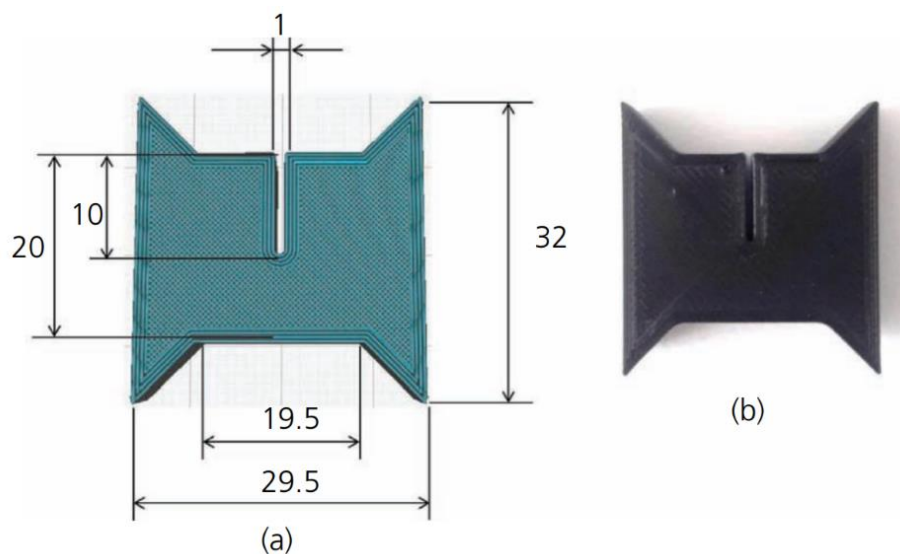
(a) Drawing (mm) (b) Basic shape of sample [67]
